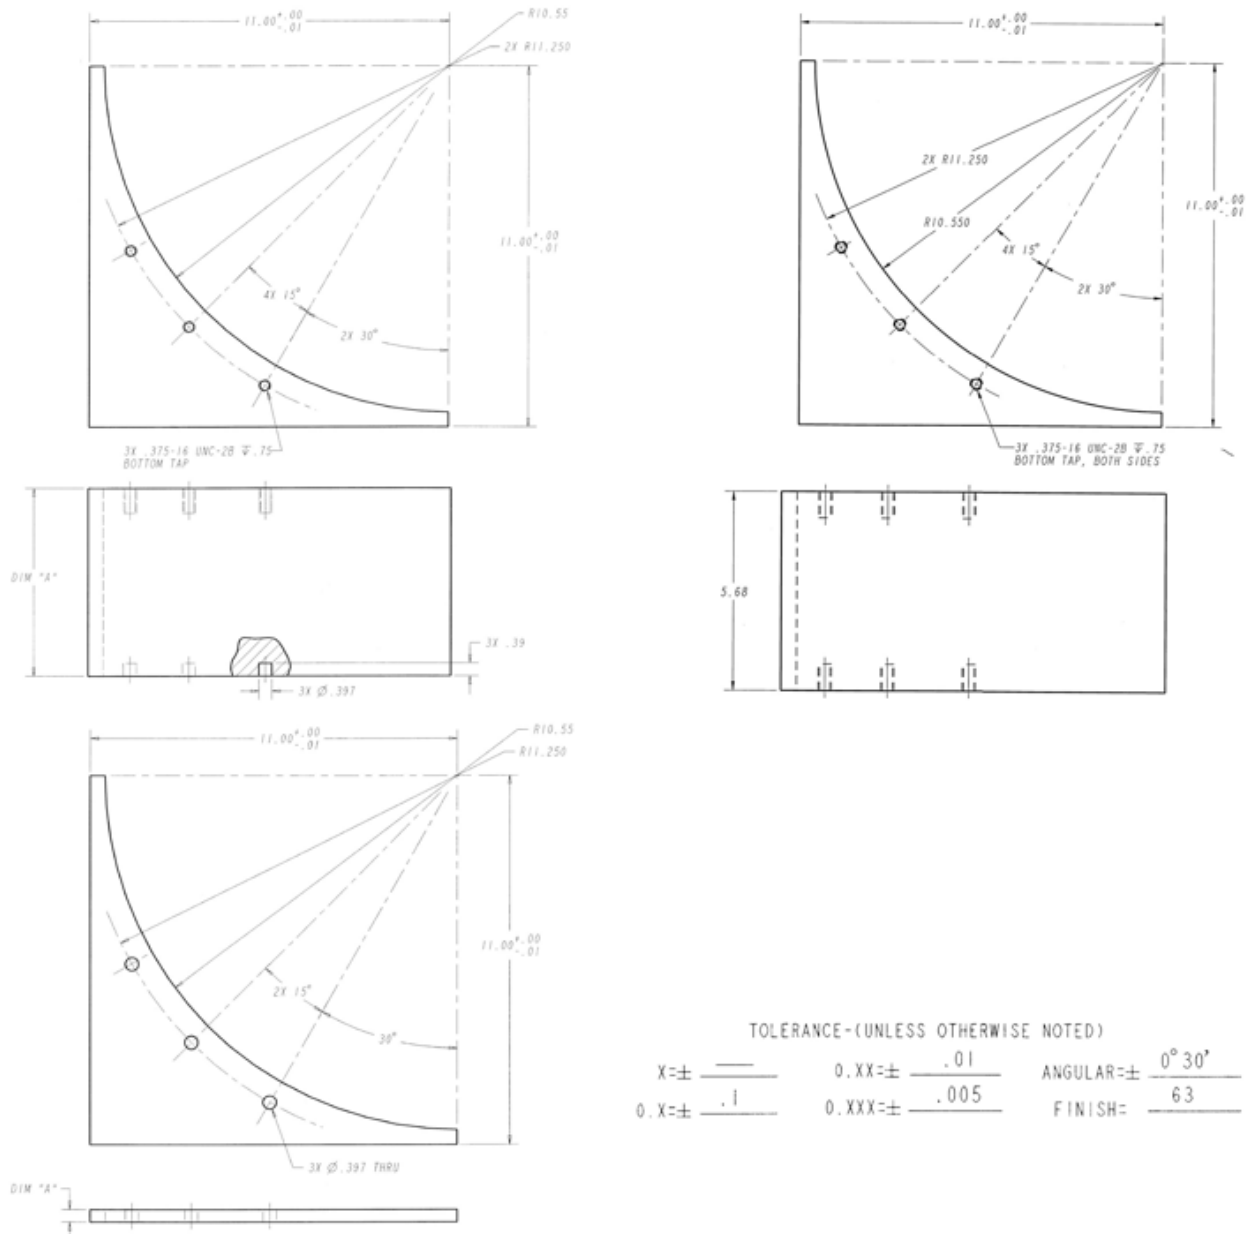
Engineering Drawing (128Y-270955-D2) of the Corner Reflectors (Dimensions in Inches). The drawing on the top left is for CR1, 2, and 4, whereas the drawing on the bottom left is for CR3, 5, 6, and 7. The drawing on the top right is for the bottom CR1 (128Y-270955-D3). See Table 11 for the values of Dim “A”, which originate from their associated engineering drawings.
